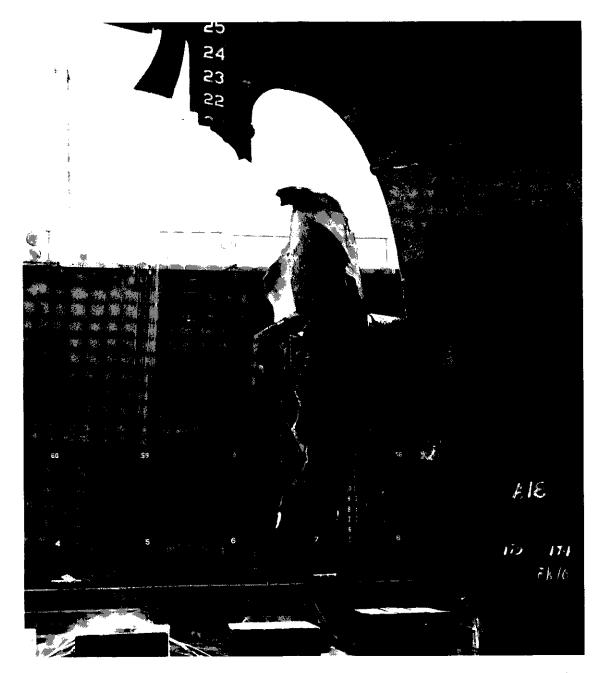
Major damage requiring replacement of much of a cast steel stern frame
